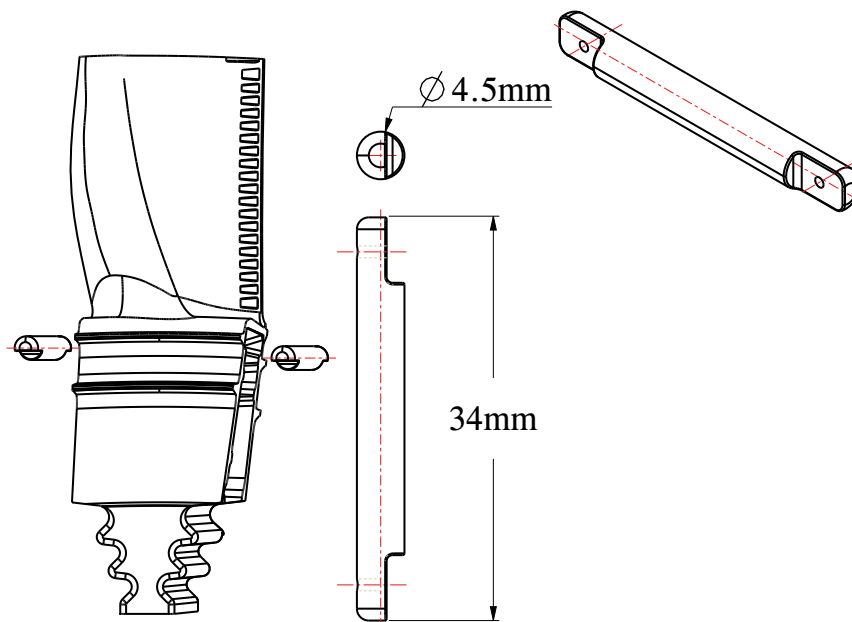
Actual turbine blade with two cylindrical dampers. On the right side a damper front and top views are enlarged to show its dimensions
